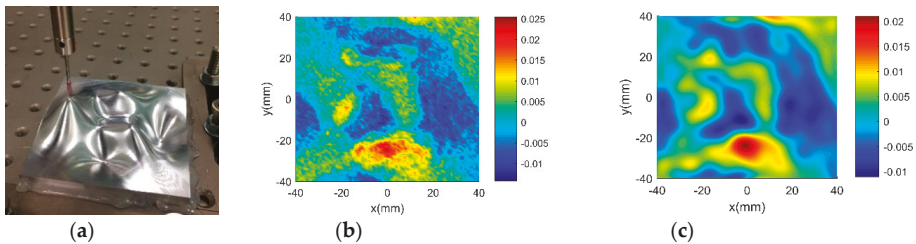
Measurement of a designed complex surfaces on multi-sensor instrument. (a) machined workpiece; (b) Benchmarking form error; (c) multi-sensor fused form error.
